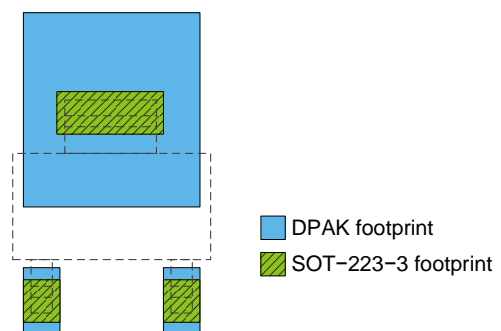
SOT-223-3 mounted on the footprint of DPAK
